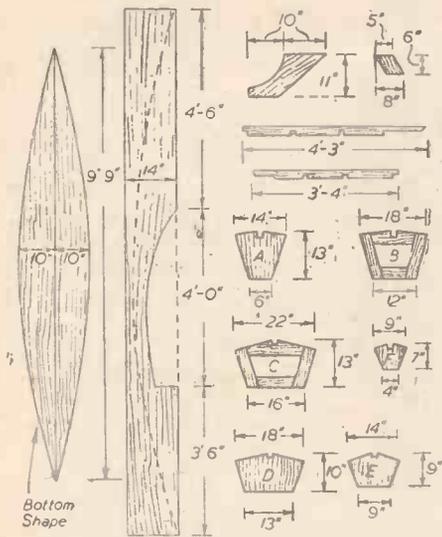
Bottom and deck shapes, with details of end posts and hull formers.
